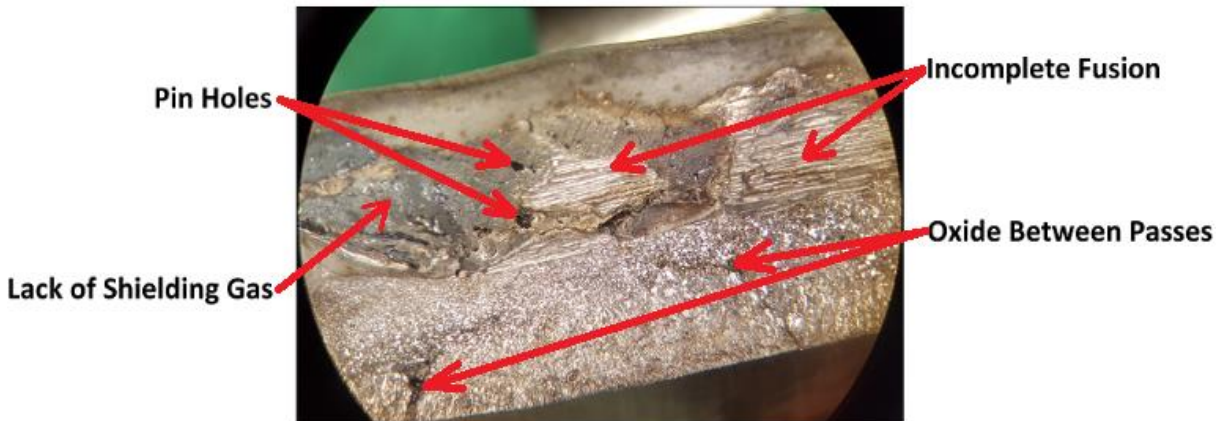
A fractograph of a 1G GMAW sample that shows signs of porosity via pin holes, a lack of shielding gas via the charred look of the metal, incomplete fusion in the form of lamination, and improper cleaning techniques in the form of oxide between passes.
